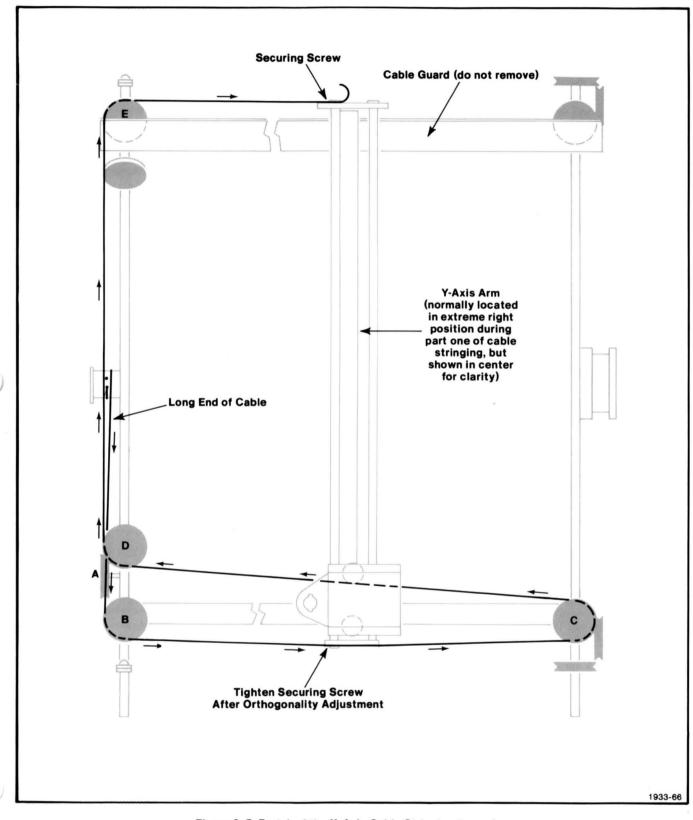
Part 1 of the X-Axis Cable Stringing Procedure.
